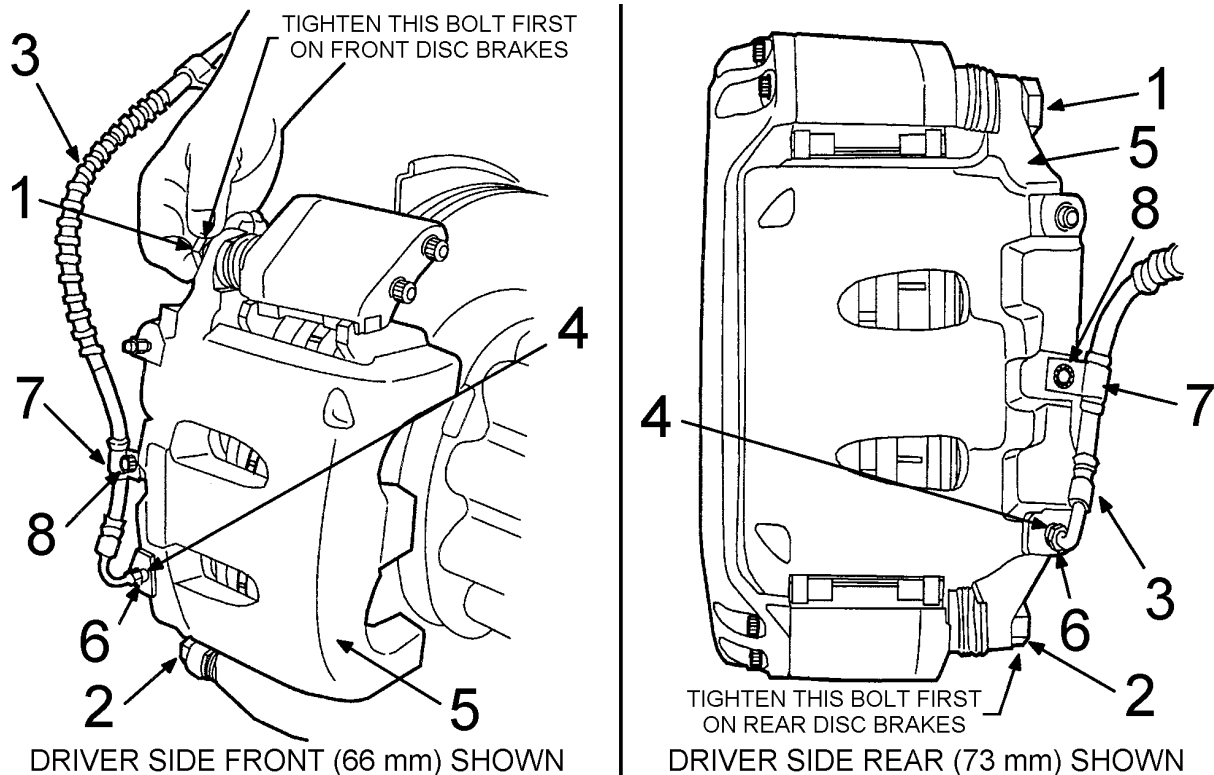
Tightening Upper and Lower Caliper Mounting Bolts in Proper Sequence
